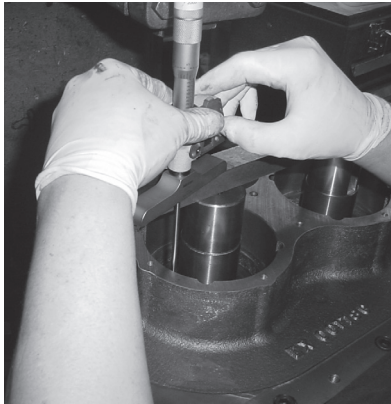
Using Depth Micrometer to Determine End Clearance
